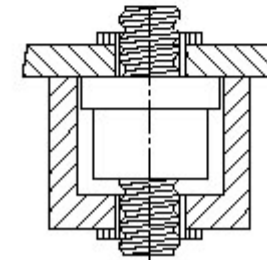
Drawing B. The support nut is fastened to the load with brackets which prevent rotation but still allowing the support nut to adapt to the position of the threaded spindle.
